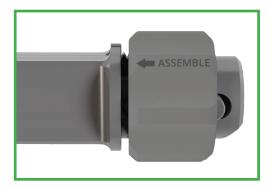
The correct direction to assemble the Knob onto the Inserter.
